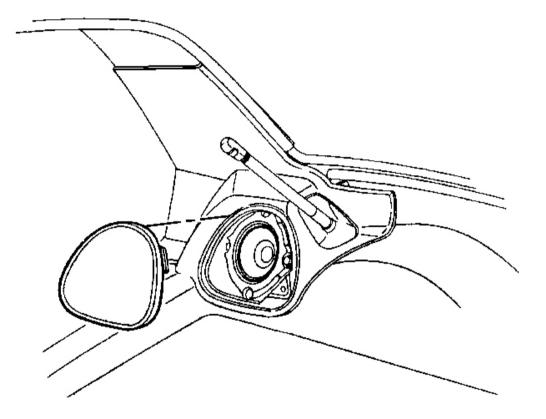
Push - In Fastener At Rear Compartment Speaker Grille Courtesy of GENERAL MOTORS CORP.
